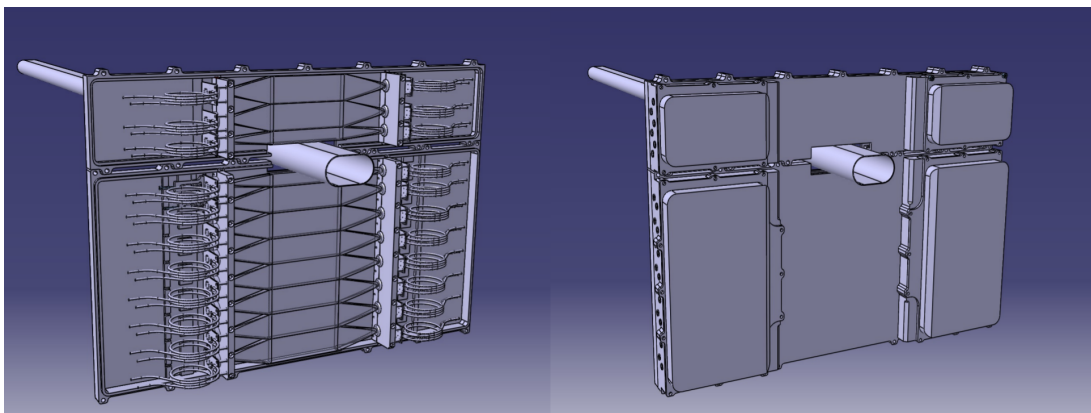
CAD drawing of the Station 3 assembly, left pane shows internals while right pane the closed and assembled module. [13]
